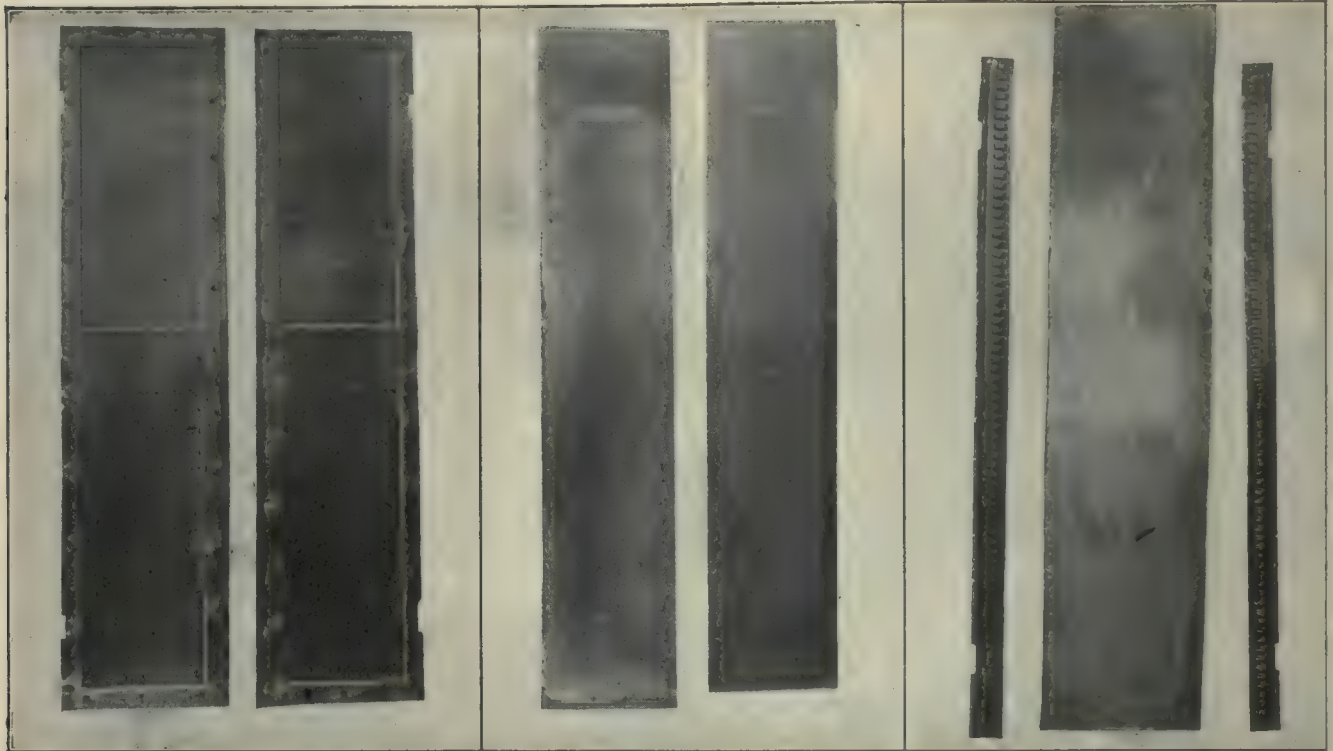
TWO SPOT-WELDED DOORS
